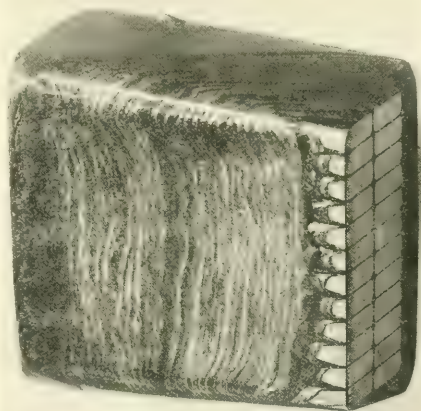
SECTION OF A 12,000 VOLT, MACHINE WRAPPED, MICA INSULATED COIL
